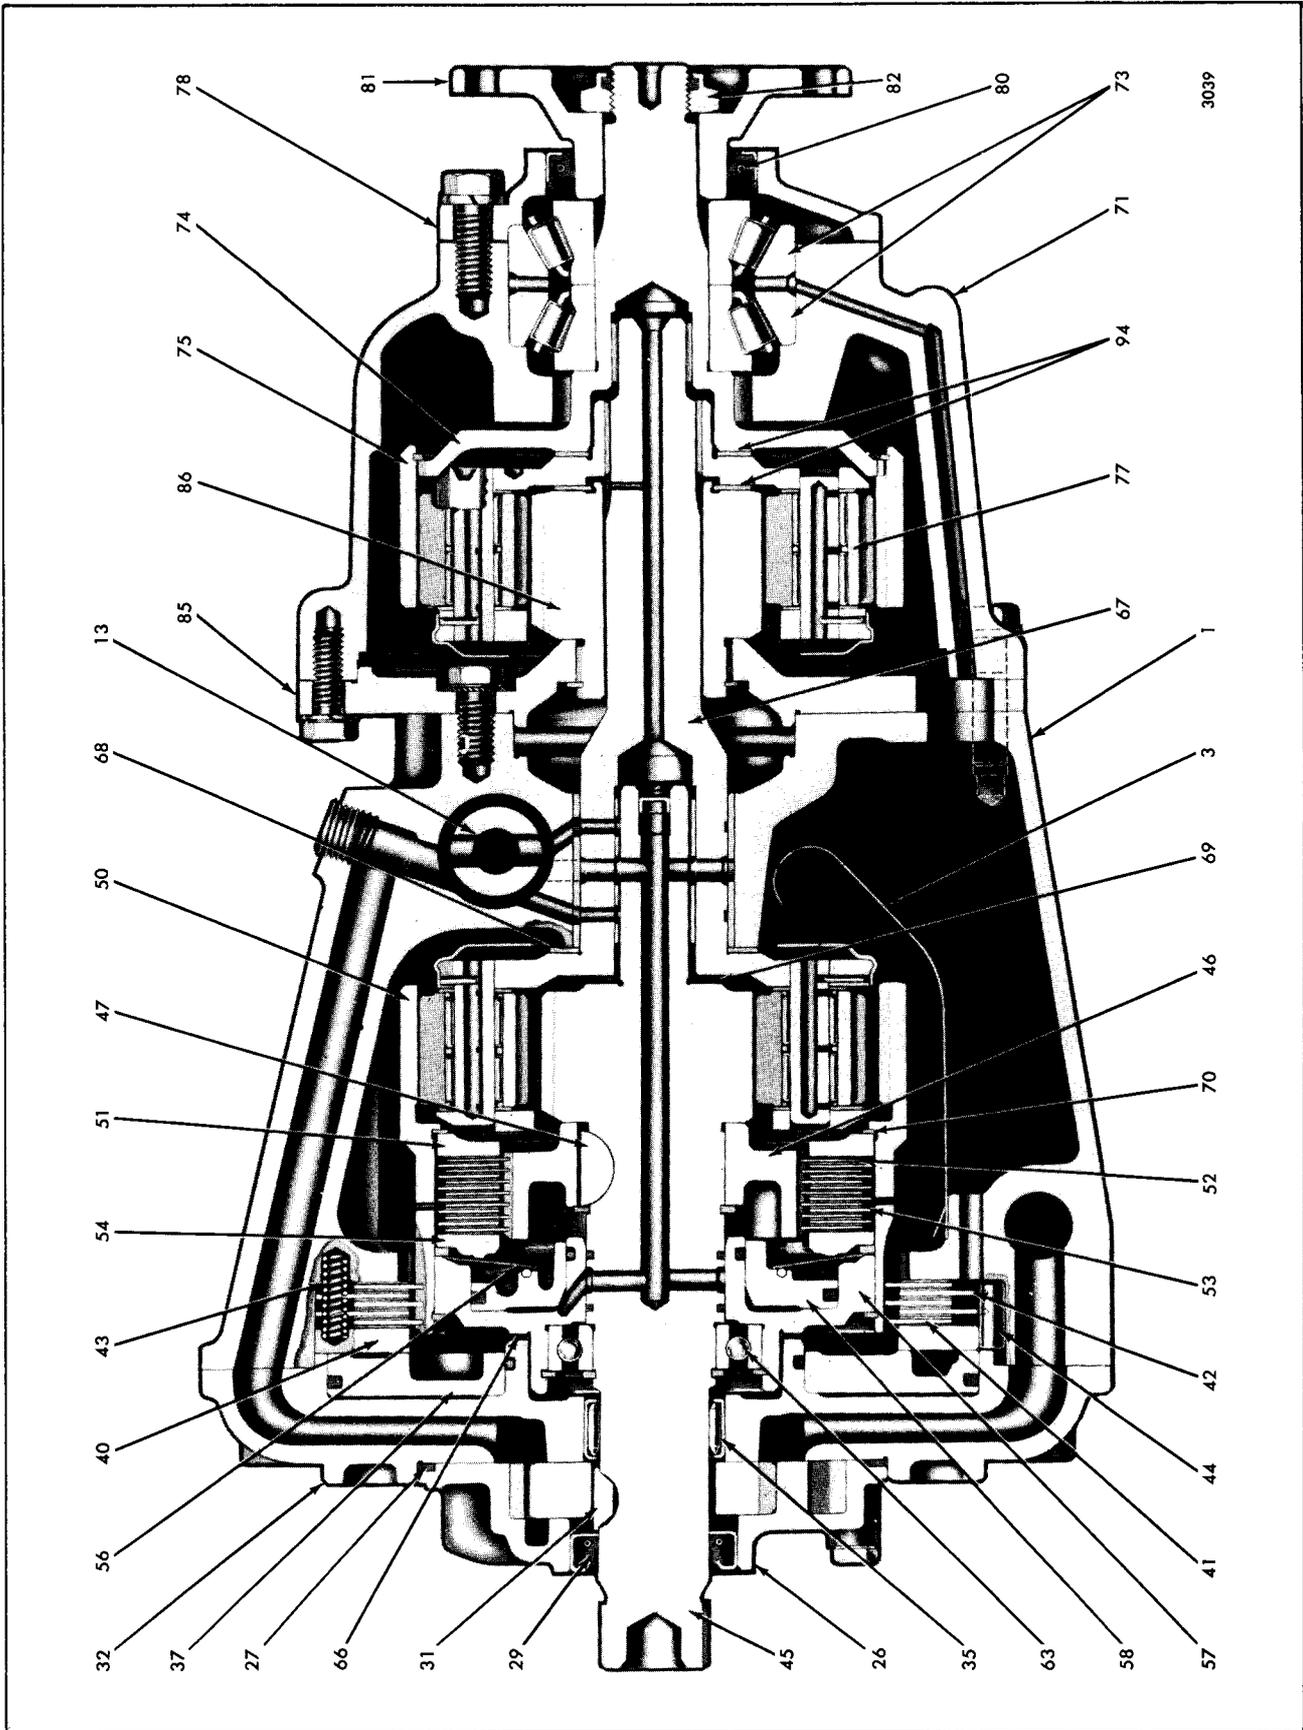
Warner Marine Gear Assembly (2.1:1 Ratio Model 72C Shown)
